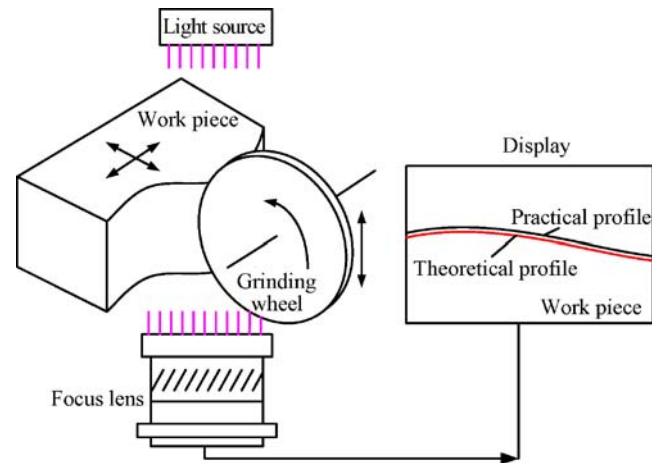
Detection principle of traditional CNC optical projection profile grinding machine
